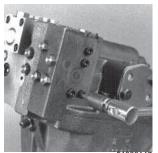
Pressure Compensator Valve Block Components
